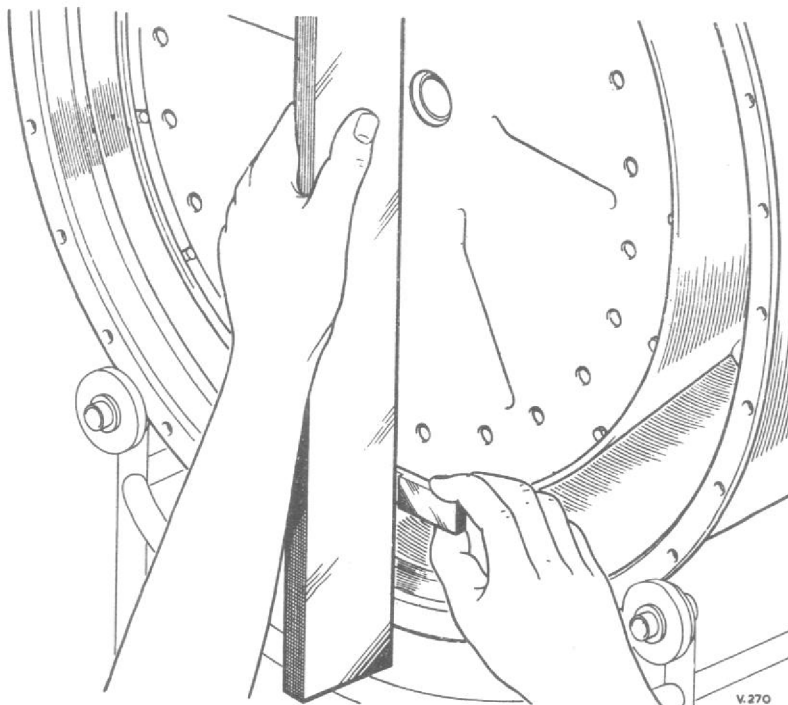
Checking the relationship of the inner exhaust cone to the outer cone front flange
